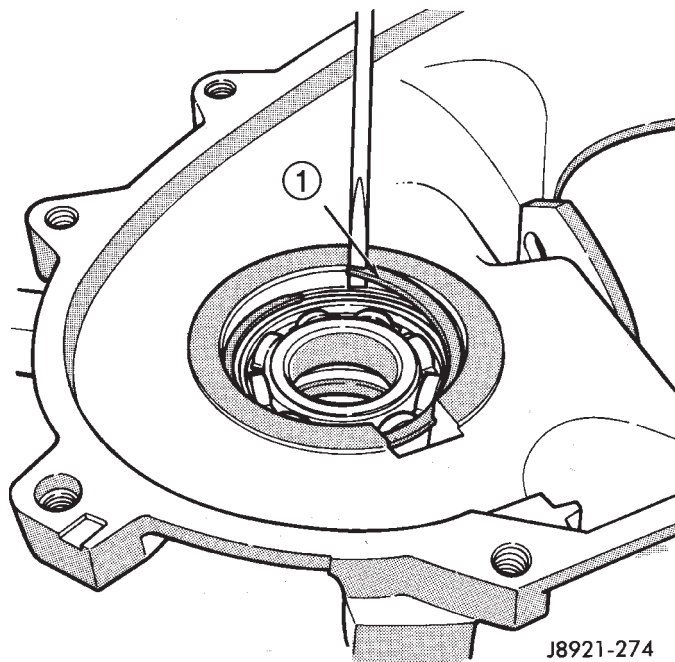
Front Output Shaft Front Bearing Snap-Ring Removal
